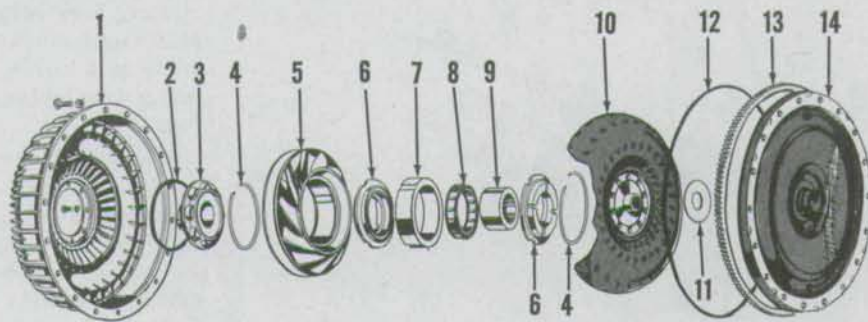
Exploded view of early torque converter unit. On late models, starter ring gear (13) is carried on flywheel rather than converter front cover (14).
